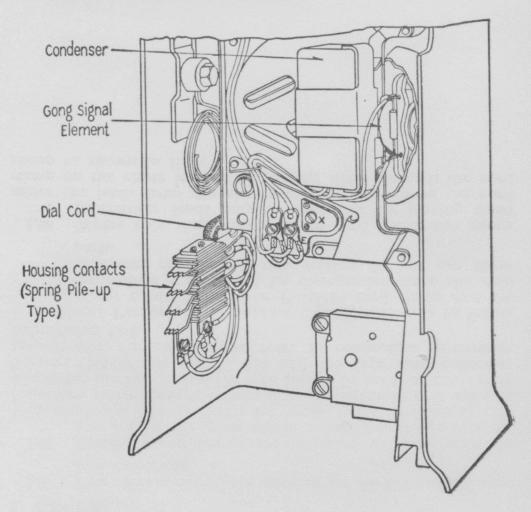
and 174 Type Coin Collectors-Upper Housing
